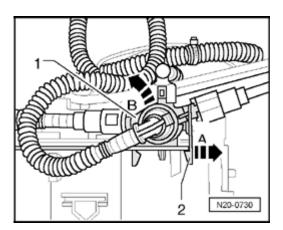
Identifying Distributor Piece Courtesy of VOLKSWAGEN UNITED STATES, INC.
